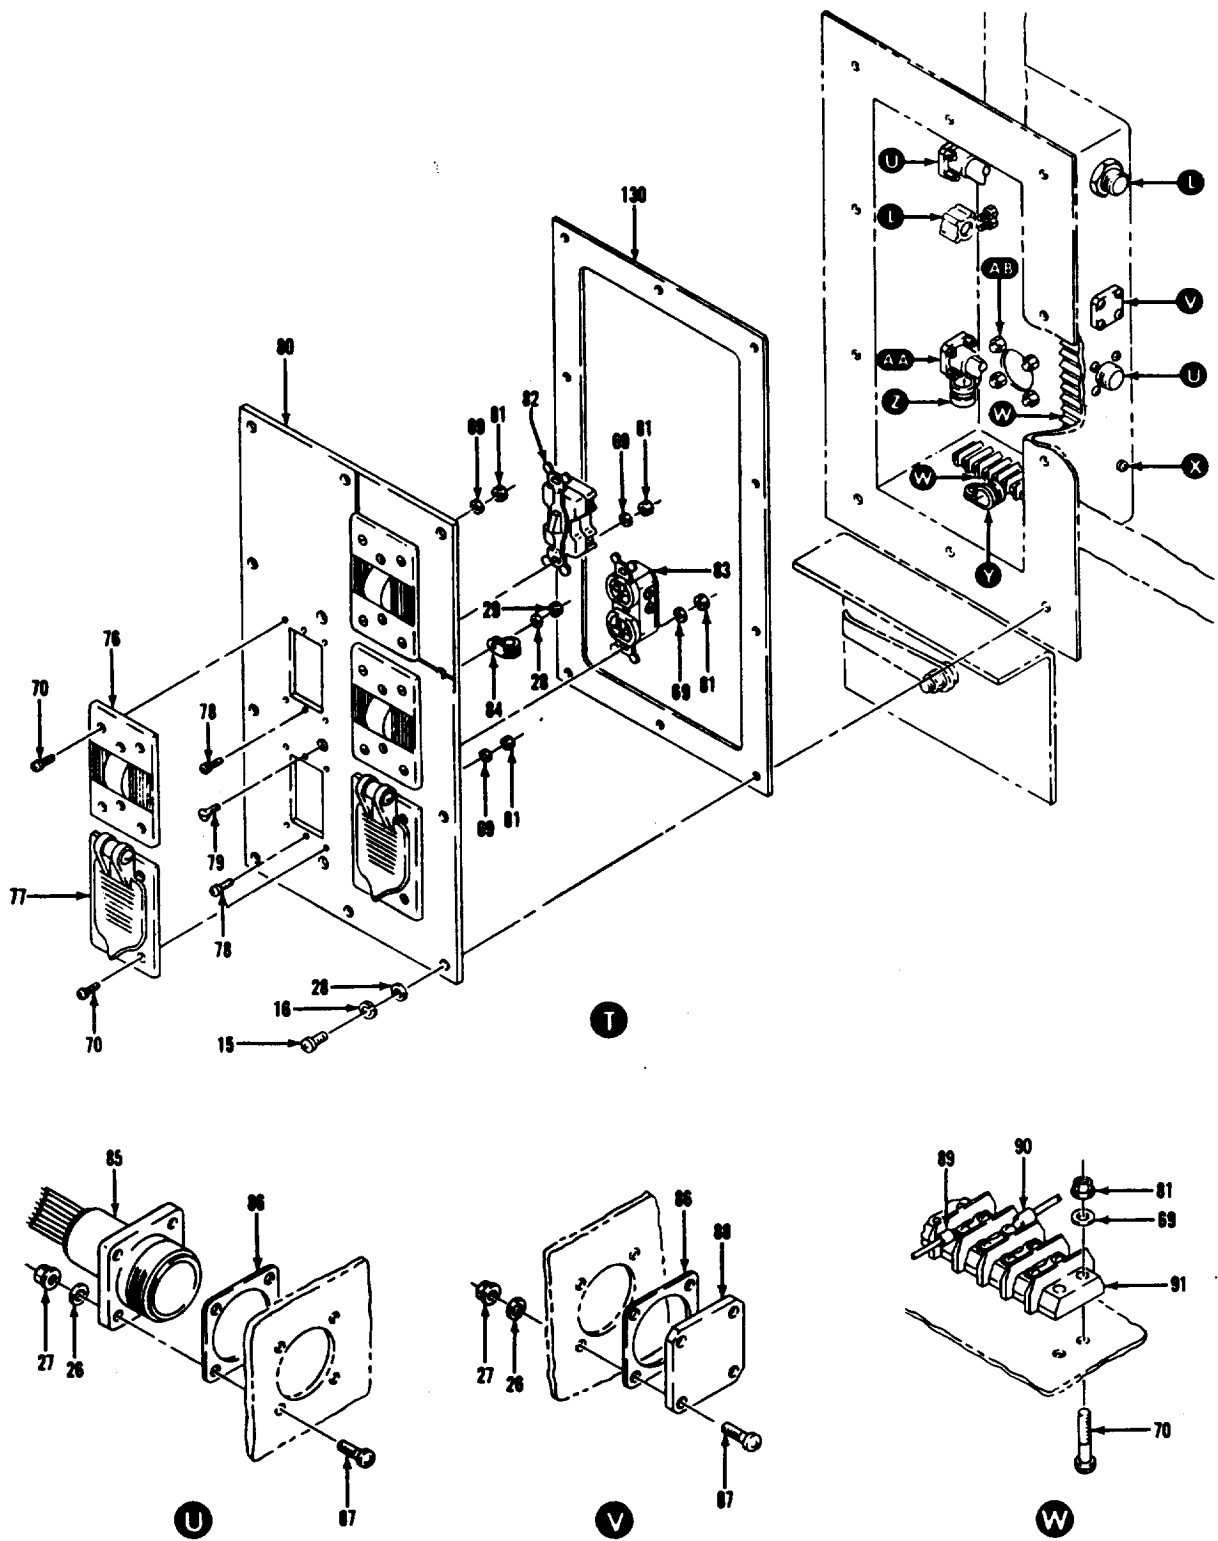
Electrical Equipment Installation (Sheet 8 of 19)
